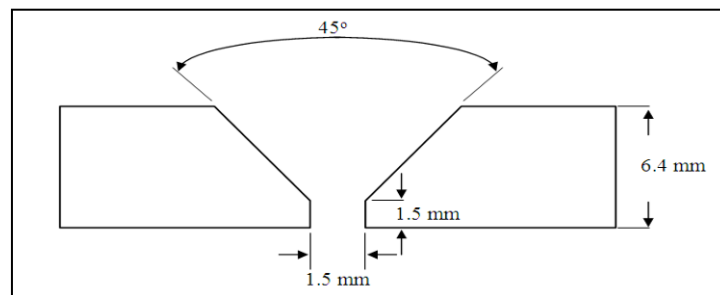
Schematic illustration of single V-groove butt weld joint.
